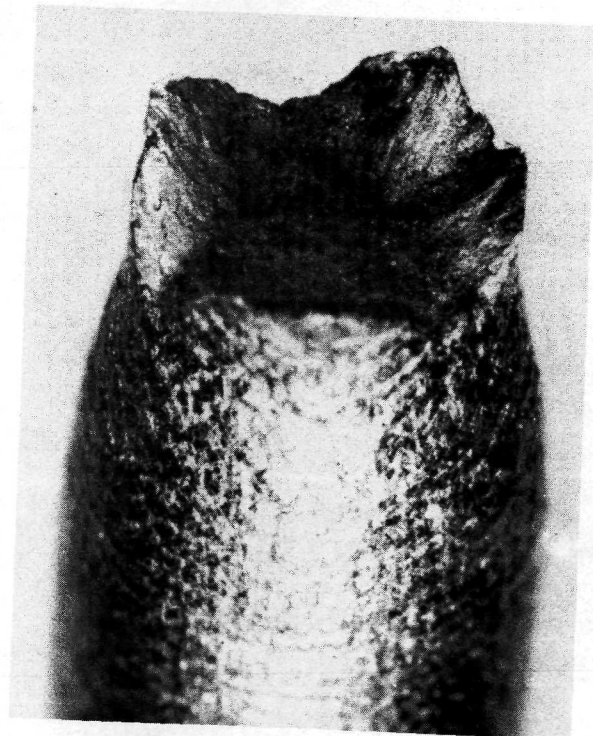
Fracture Appearance for AISI 316 Stainless Steel
